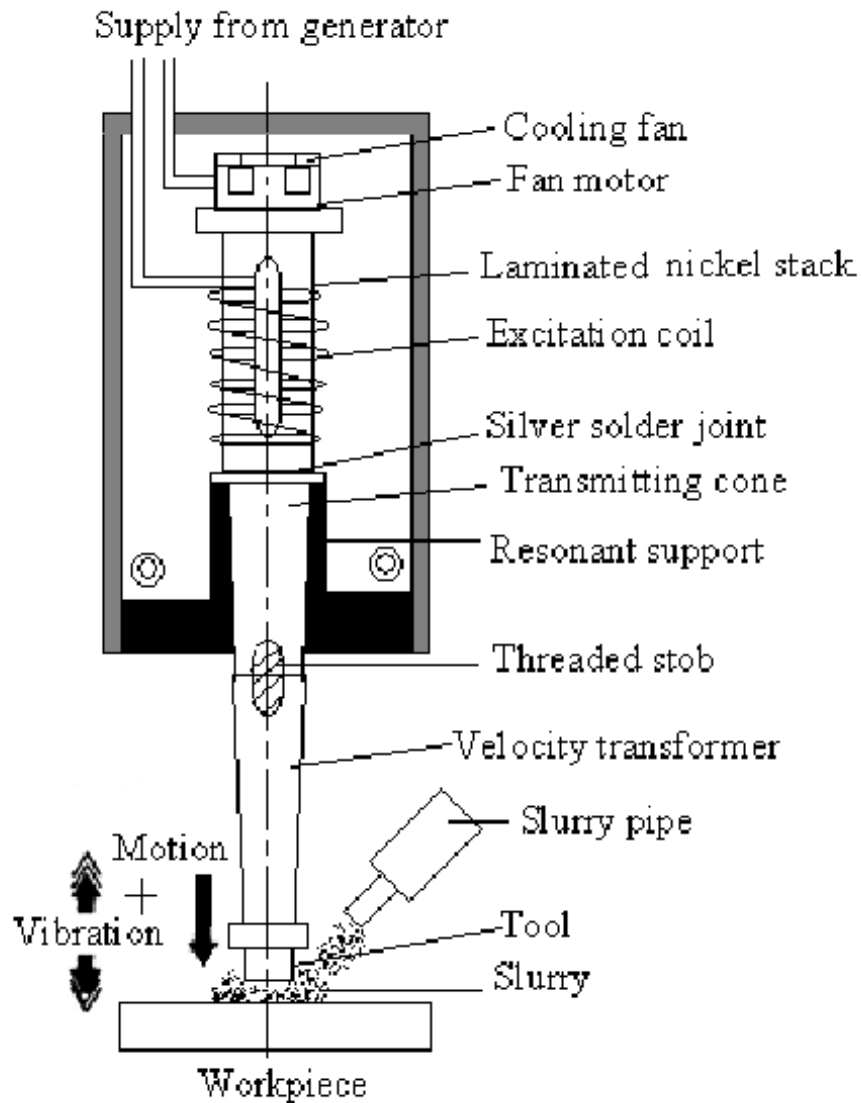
Principle of ultrasonic machining [Goldman 1962]
